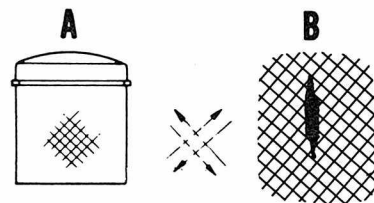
Refer to text for fitting piston to cylinder (A) and for removing material transferred to cylinder bore (B).
